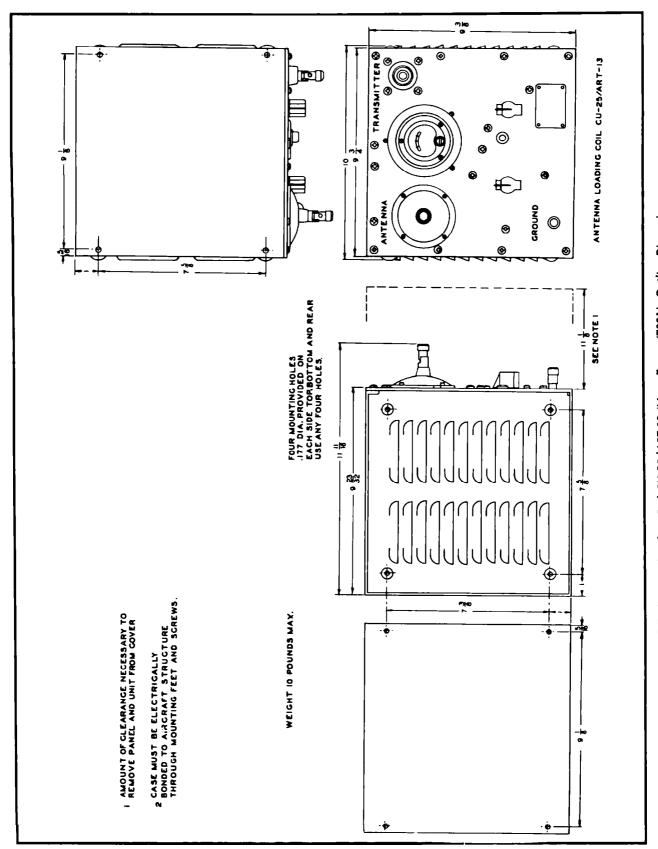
Antenna Loading Coil CU-25/ART-13 (Navy Type -47281)--Outline Dimensions
